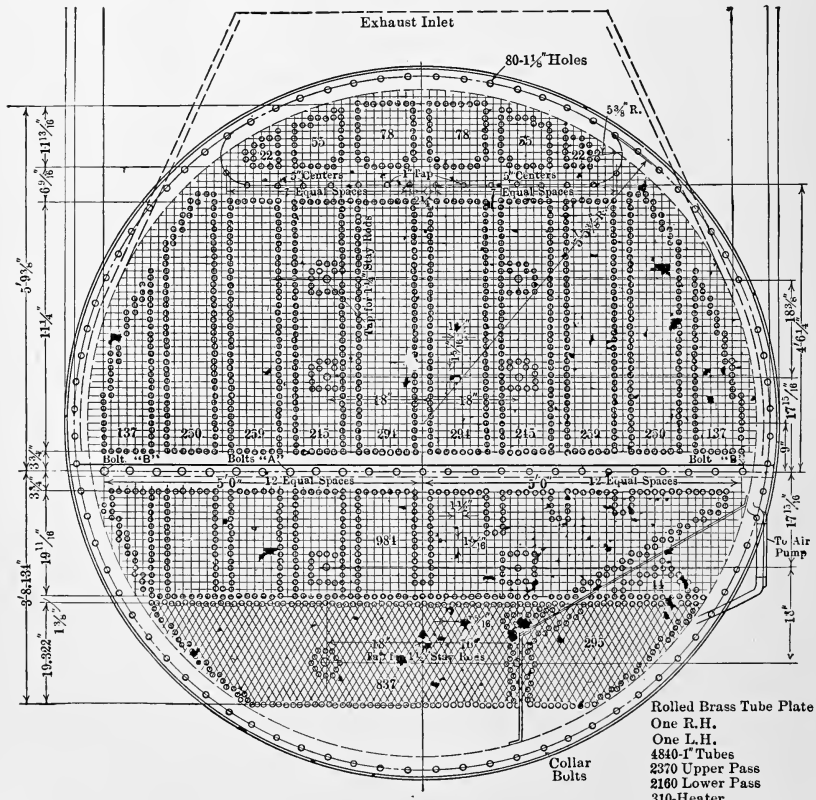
Arrangement of Tubes in a Large Wheeler Surface Condenser Showing Steam Lane and Differential Spacing.
